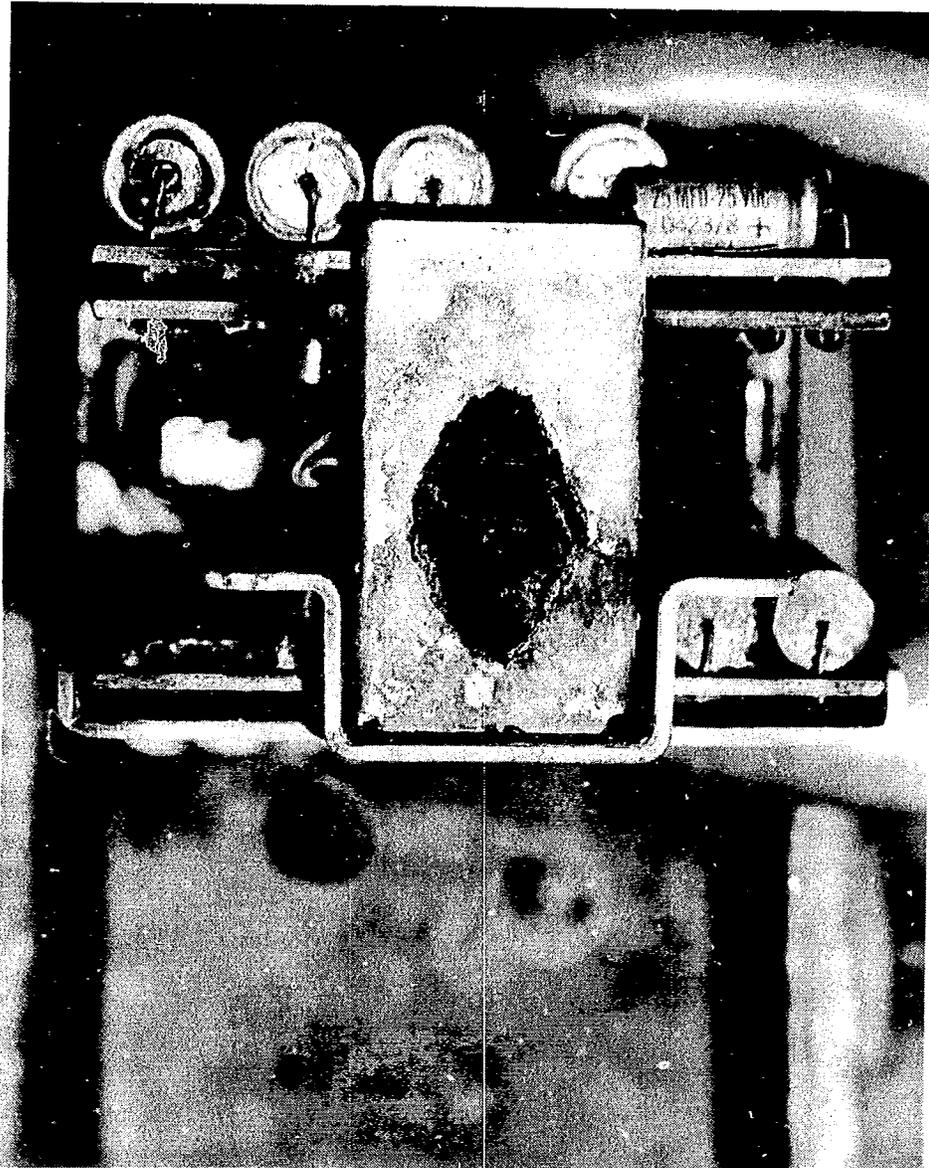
Photograph, Bailey pressure transmitter, circuit board, bottom view.
